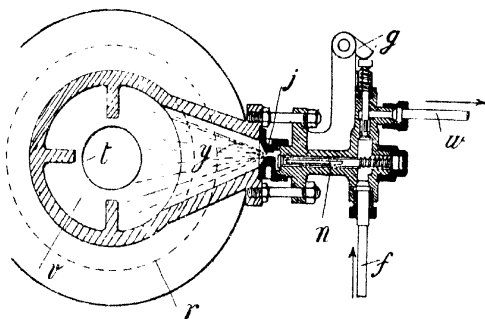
Cross section of vaporiser used in the Hornsby-Akroyd residual-oil engine, showing details of the injection feed.
